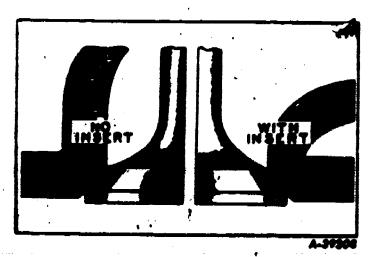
Valve Seat Too Doop in Cylinder Head.
